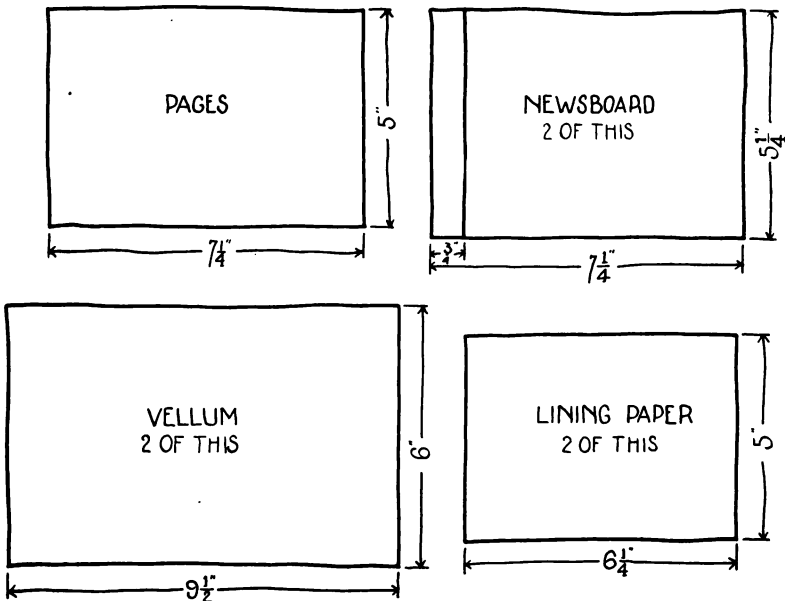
PLATE XXIII. Freehand dimensioned sketches showing parts of a sketch book cover.
